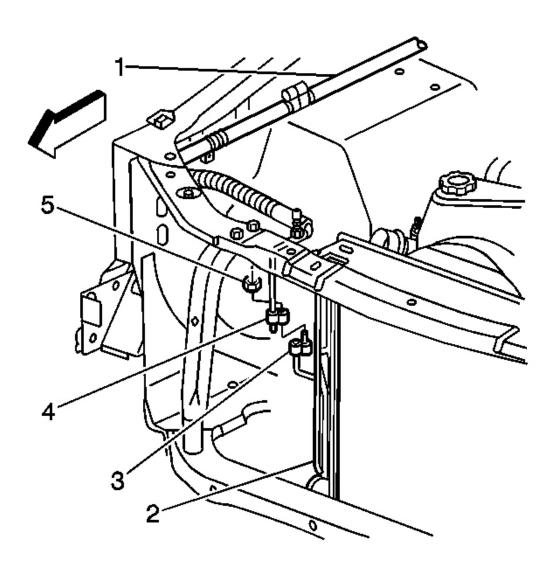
View Of Condenser Components Courtesy of GENERAL MOTORS CORP.
